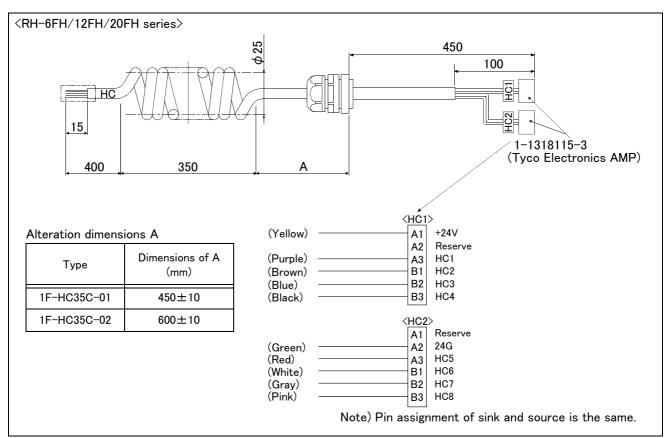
Outside dimensional drawing and pin assignment (RH-6FH/12FH/20FH series)
